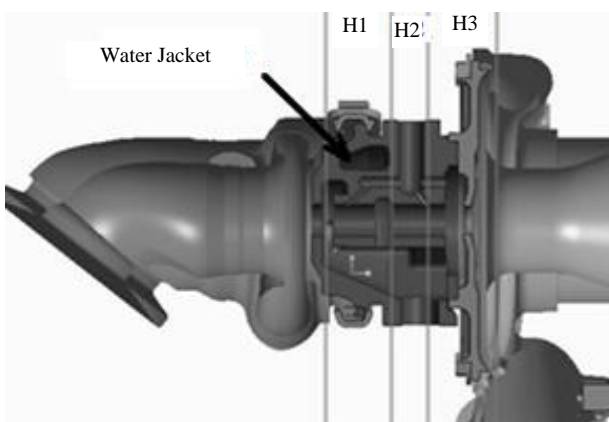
Sectioned view of mentioned turbocharger with Position of Temperature sensors on bearing housing
